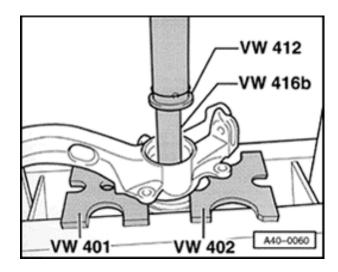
Pressing wheel hub out of wheel bearing housing with 75 mm diameter
